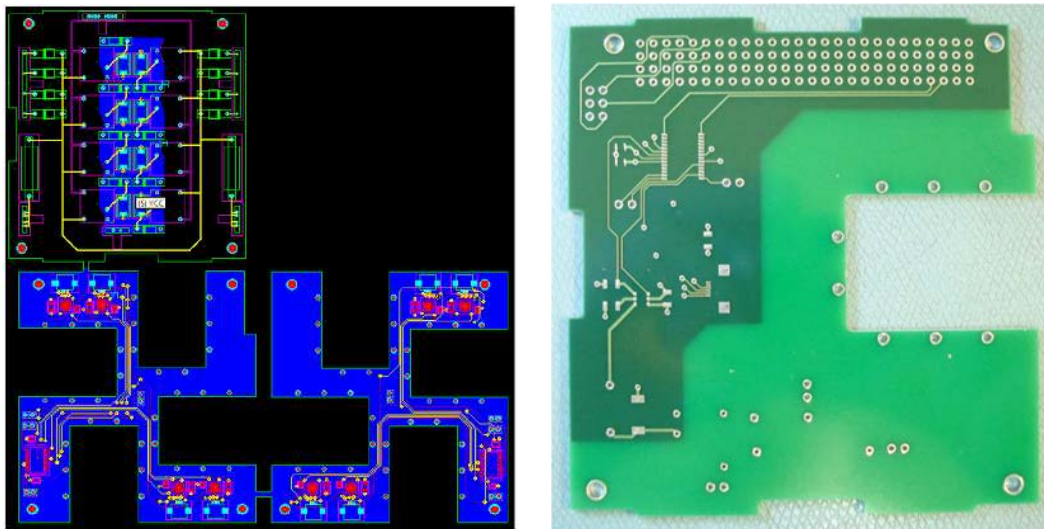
The PCB layout for the STRaND μ PPT flight module and the manufactured PCB for the qualification model
